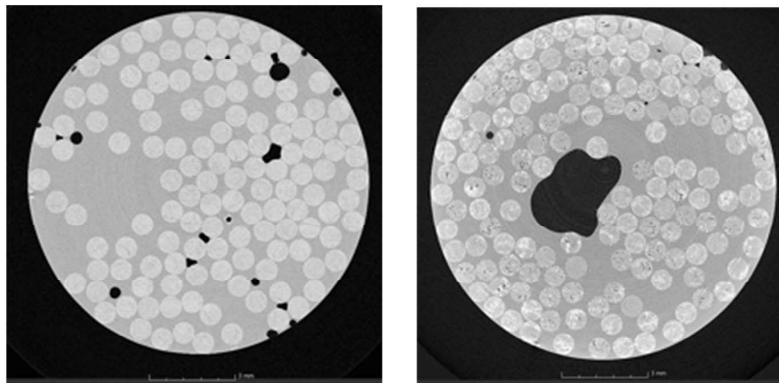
CT scan slices of struts manufactured using glass tools, 0.8mm diameter rods.
